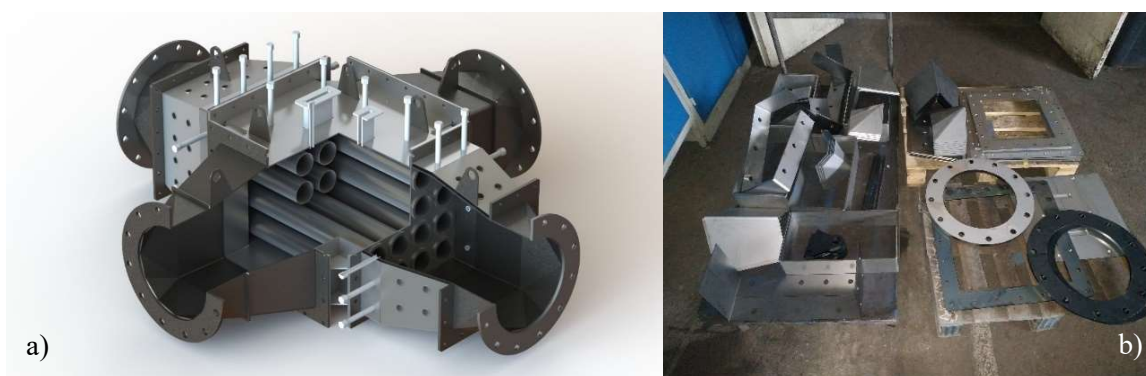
a) Partial section of the final design of the developed device, b) cut and folded metal sheets of the device prepared for welding.
